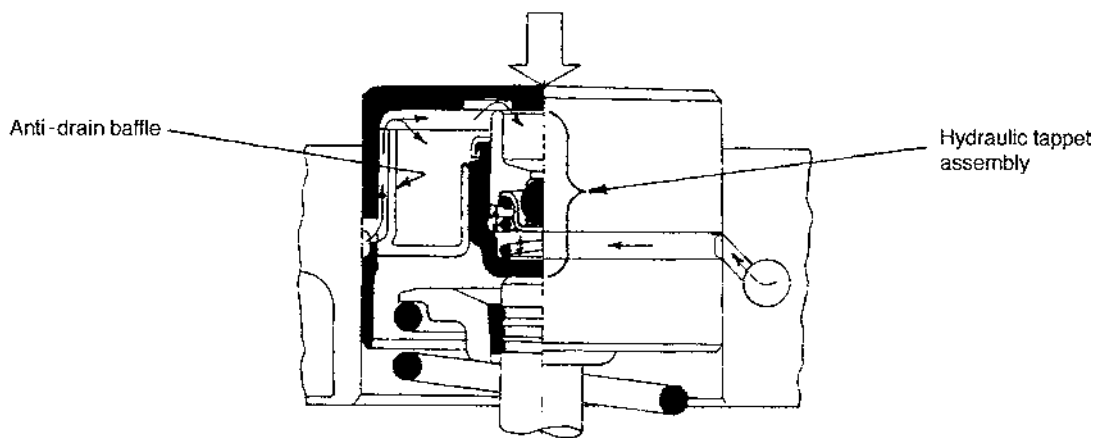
Schematic arrangement of a hydraulic bucket tappet showing method of oil feed
